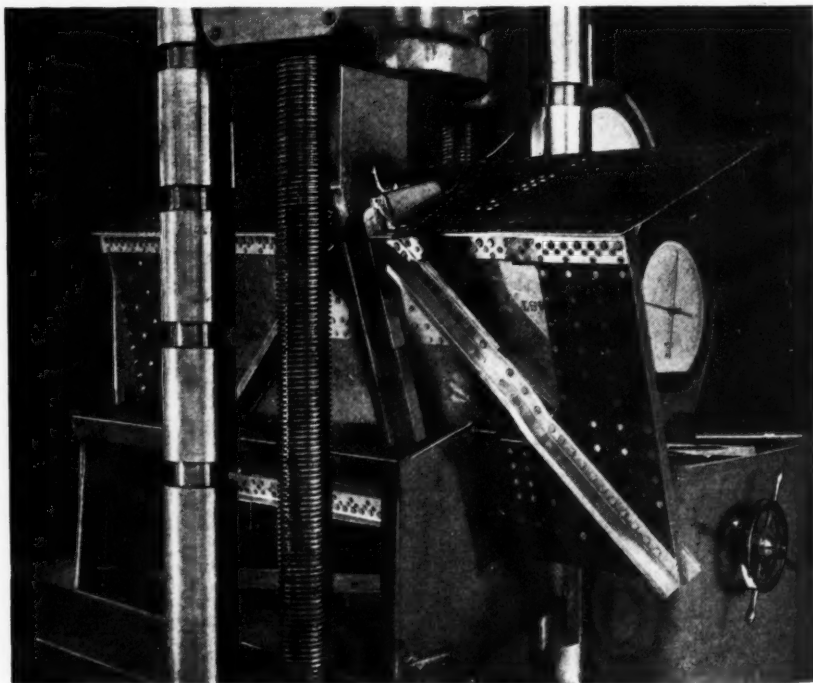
Checking a Fitting that is Built up of Extruded and Formed Aluminum-alloy Shapes and Sheets on a Compression-tension Testing Machine
